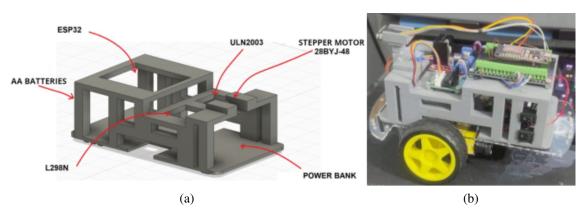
Design of the support structure (a) CAD design of the support and (b) side view of the prototype robot
